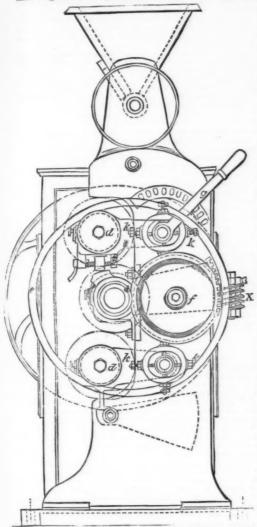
shows a cross section of the machine as originally patented, with the position of the rollers, which, as will be
